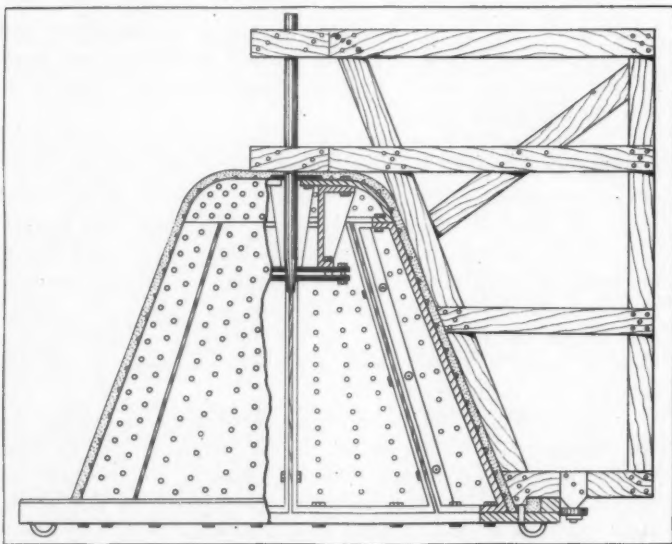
CONE-SHAPED BARREL ON WHICH THE COPE IS SWEEP-UP
